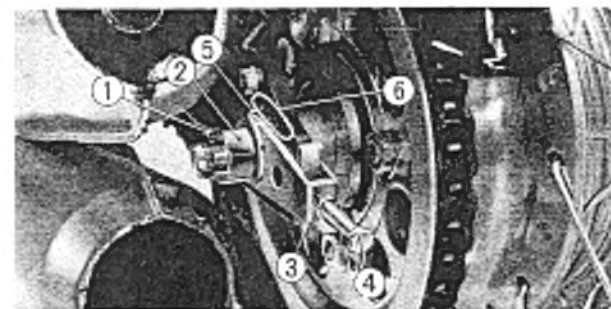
① Cotter pin ④ Adjusting nut
